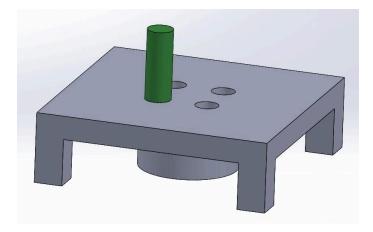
CAD assembly of Razor 2-Step with stamps and frame
